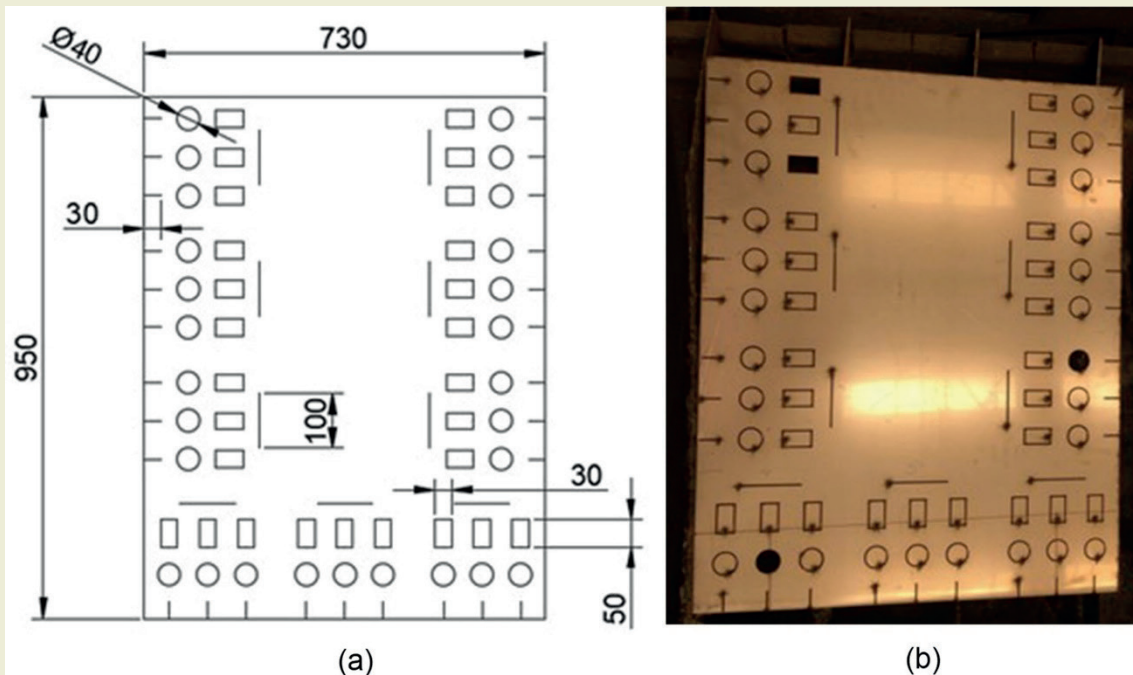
Geometries of the test samples: a) technical drawing and b) processed state with PAC [49]
